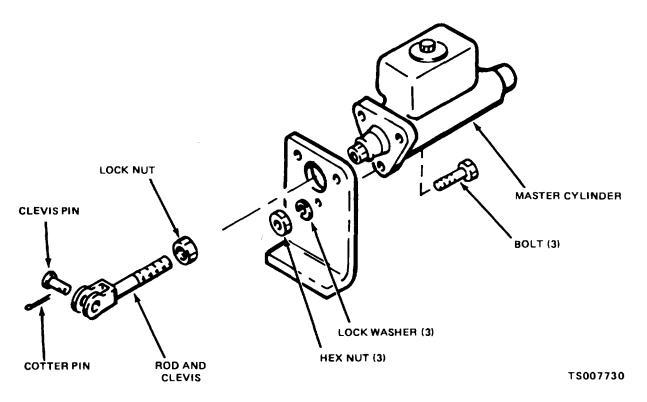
Inching Brake Master Cylinder, Removal and Installation
